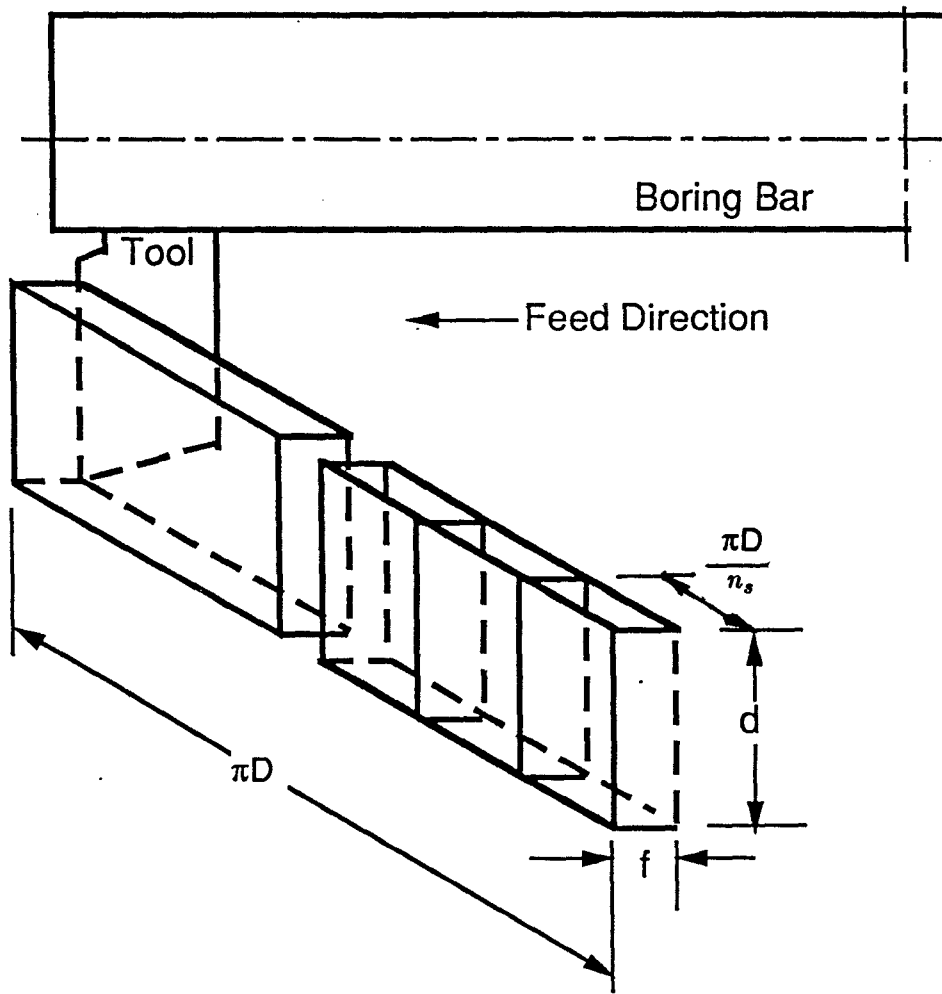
Geometric Shape and Size of Samples Assumed During Machining
